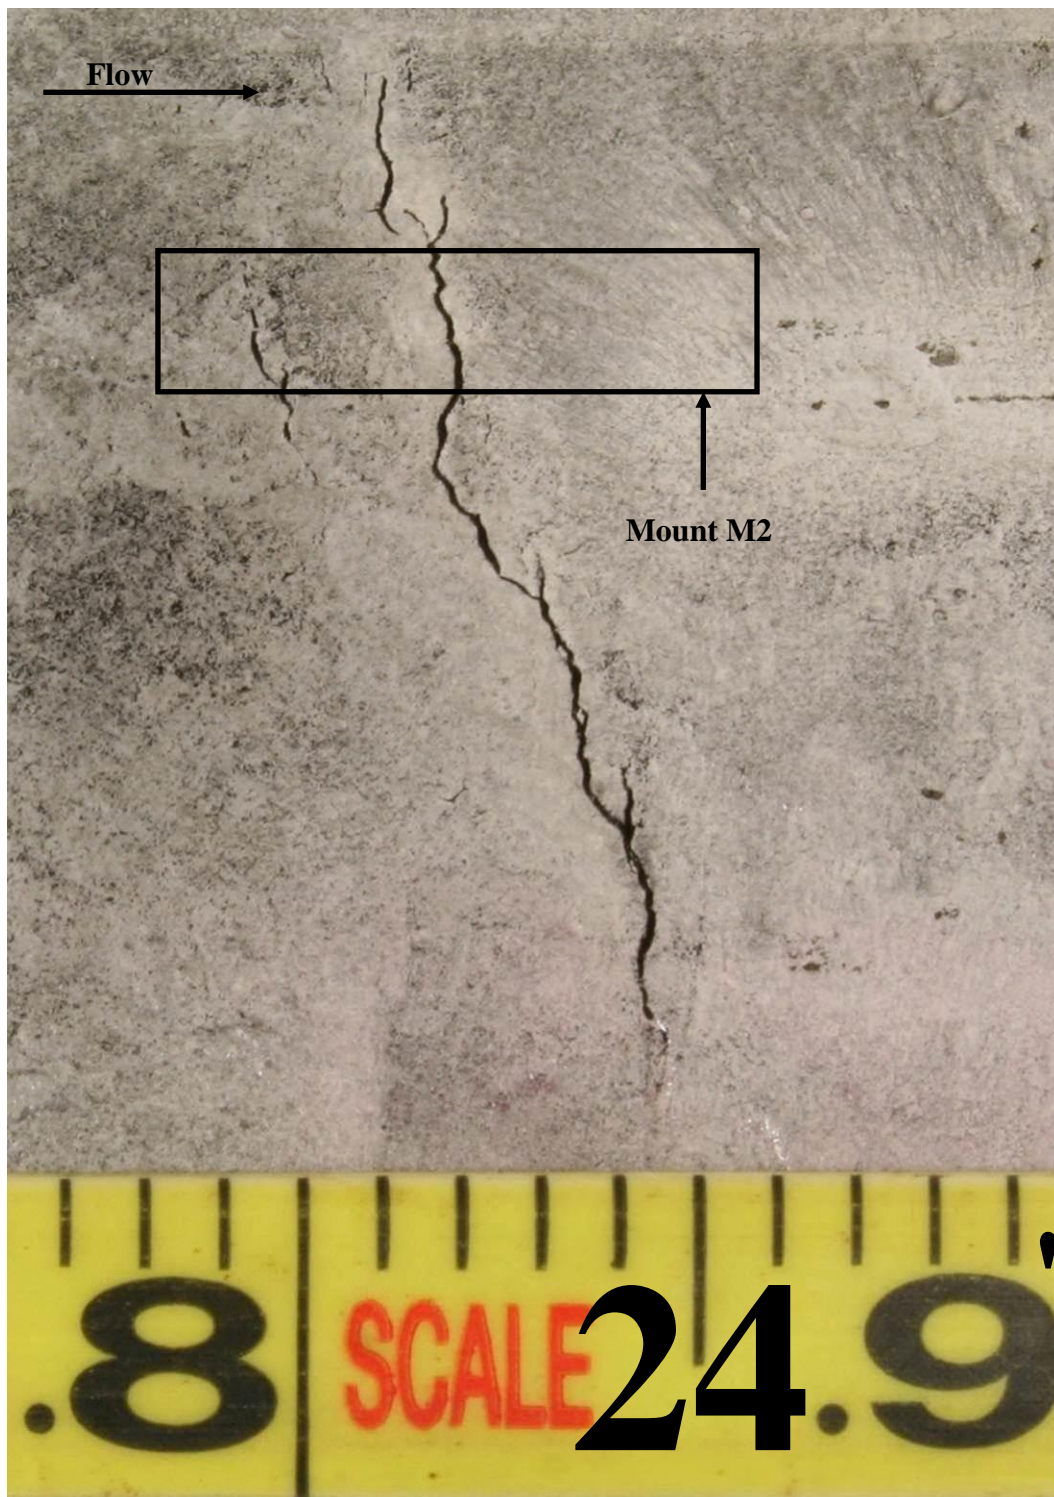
Photograph of the external pipe surface showing Crack Colony 2 following MPI. The tape measure indicates the distance from the U/S girth weld.
